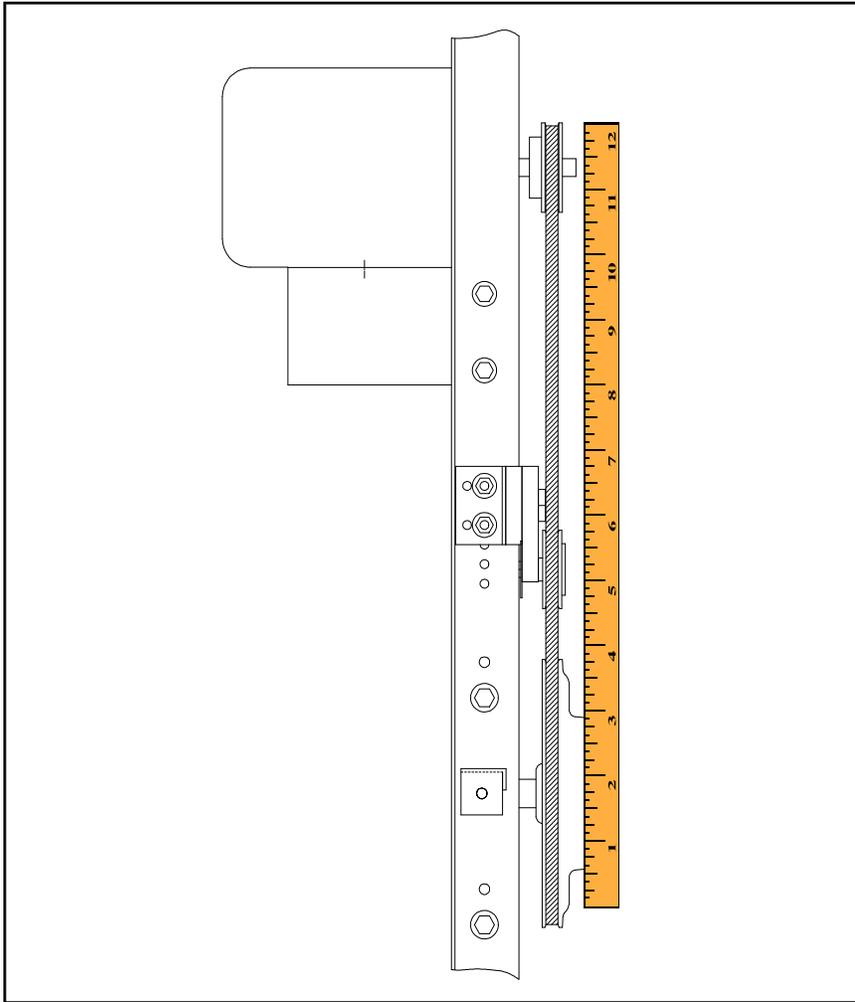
Detailed View of Properly Aligned Fan Sheaves
